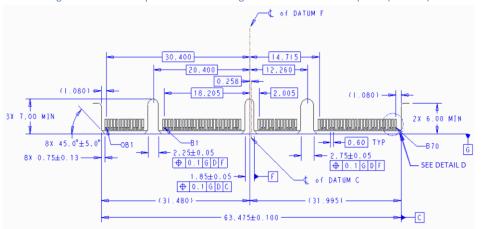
SFF Primary Connector Gold Finger Dimensions – x16 – Top Side ("B" Pins)
